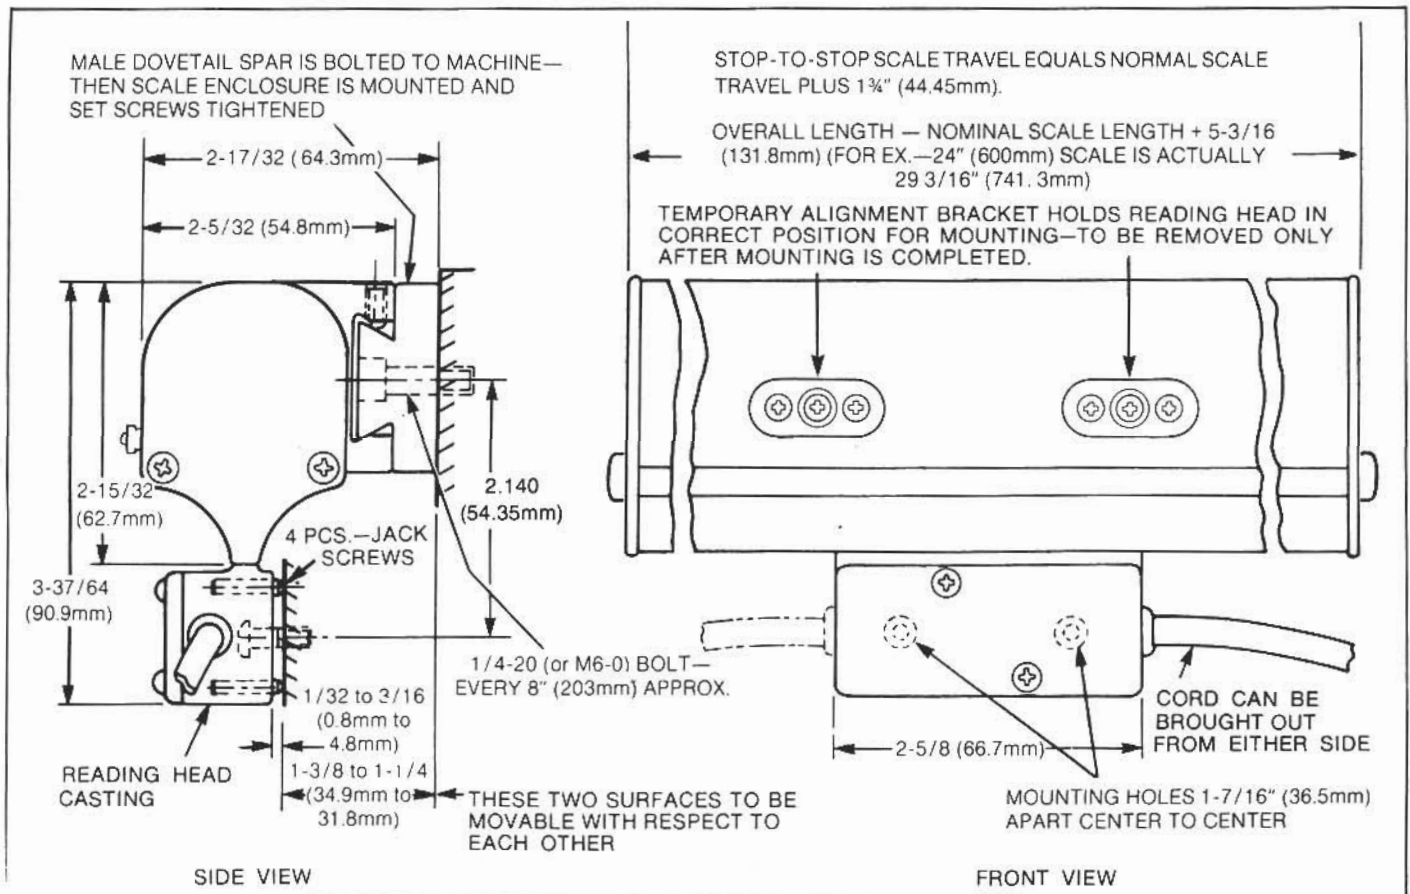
A-R/5 Scale Assembly Dimensions and Mounting Data
